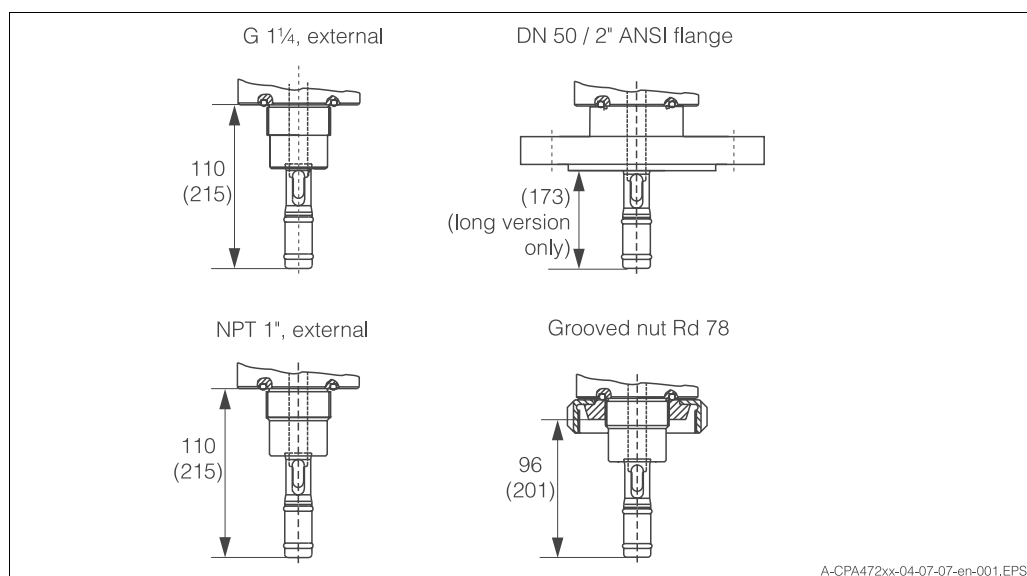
Existing process connections for the CleanFit P CPA 472 assembly
